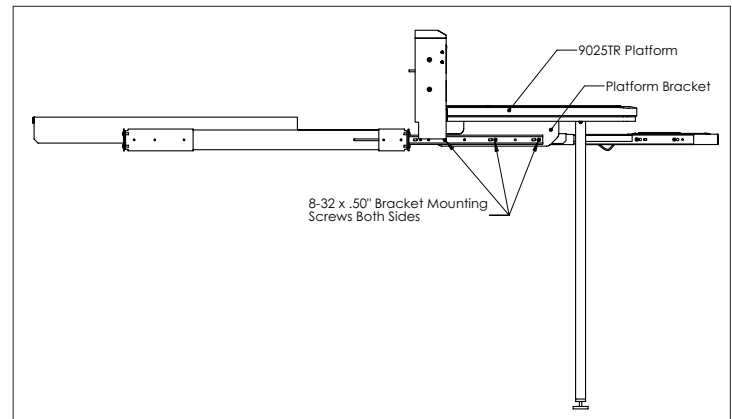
Figure C. The brackets will be securely attached to the slides after the mounting screws are installed.
